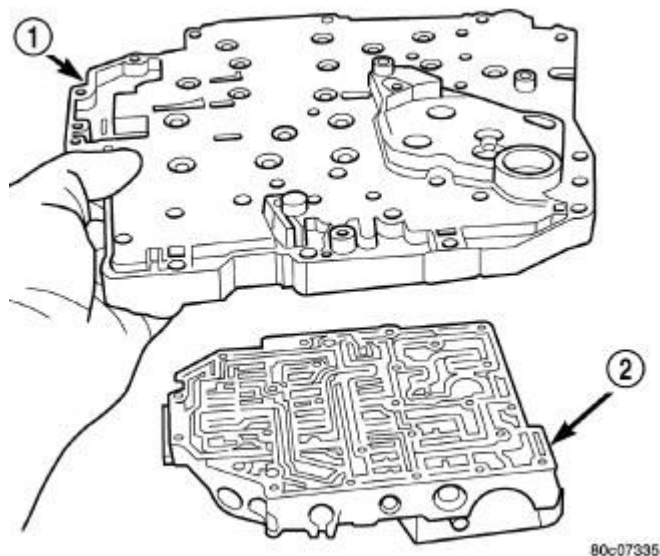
Remove/Install Transfer Plate-at-Valve Body
